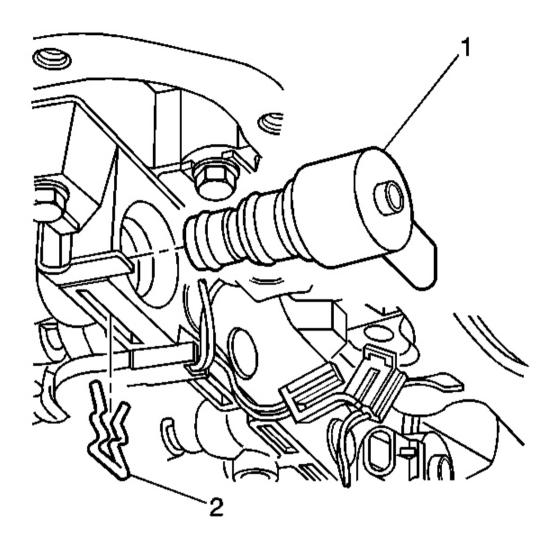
Installing The TCC PWM Solenoid Courtesy of GENERAL MOTORS CORP.
